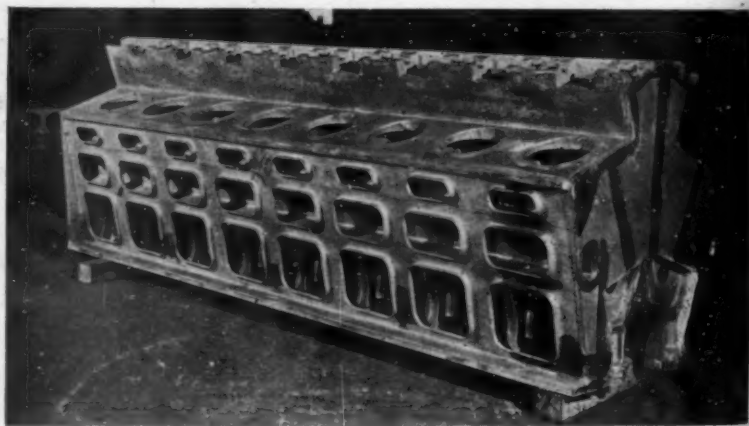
16-cylinder "V" type welded Diesel engine frame.
